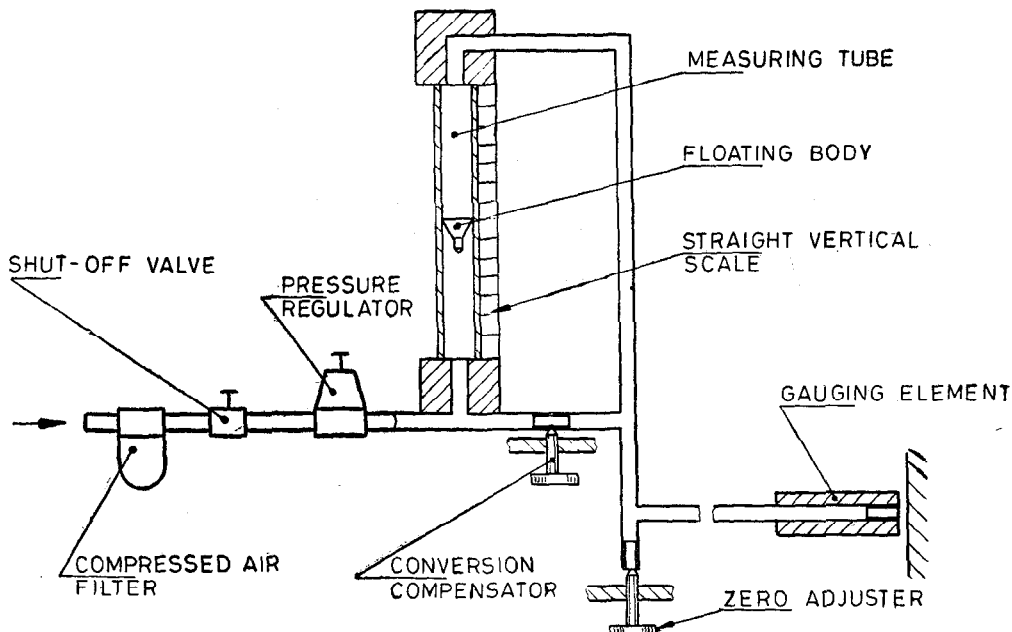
COLUMN TYPE INDICATING INSTRUMENT WITH STRAIGHT VERTICAL SCALE
